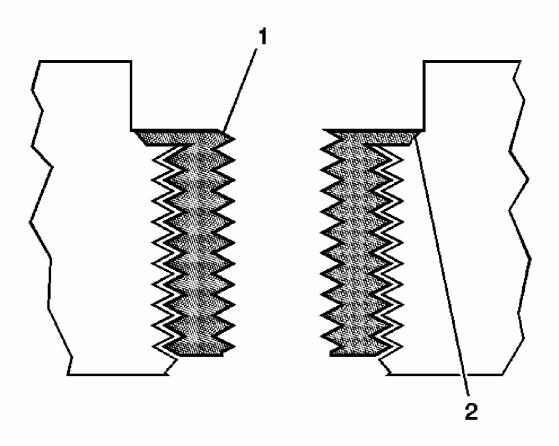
Inspecting Insert For Proper Installation - Recessed Thread Courtesy of GENERAL MOTORS CORP.
